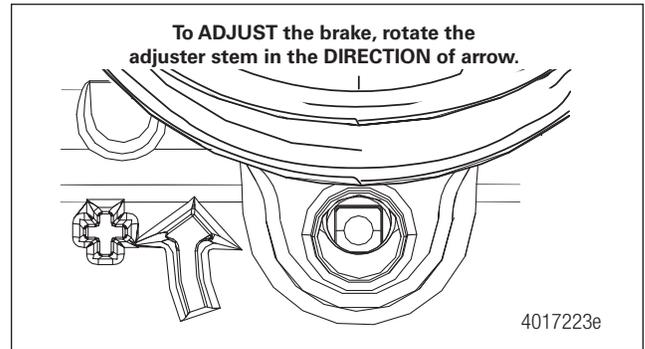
Adjustment Arrow Cast into the Caliper Housing (LH).
